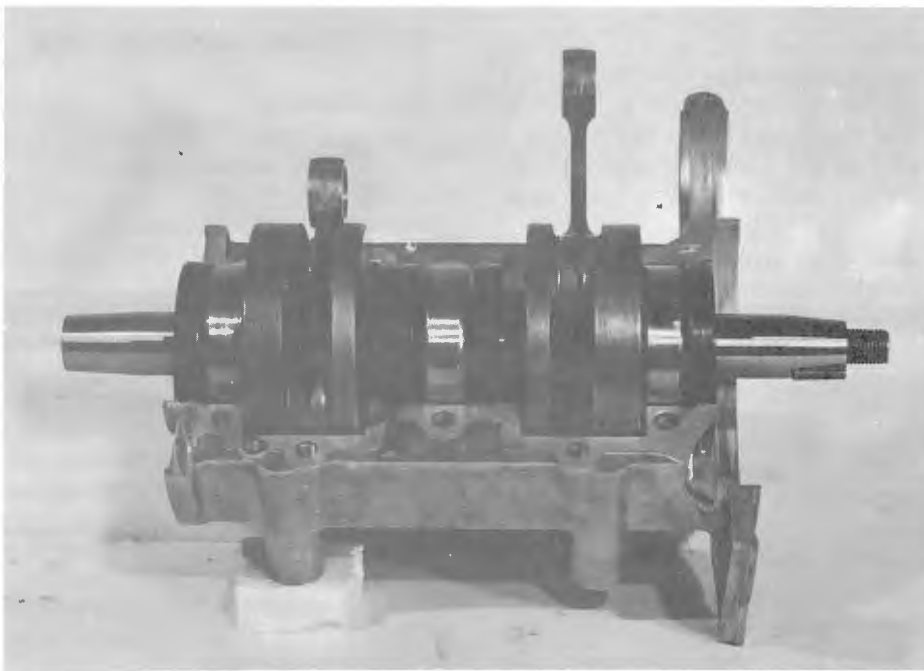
CRANKSHAFT IN LOWER CRANKCASE
